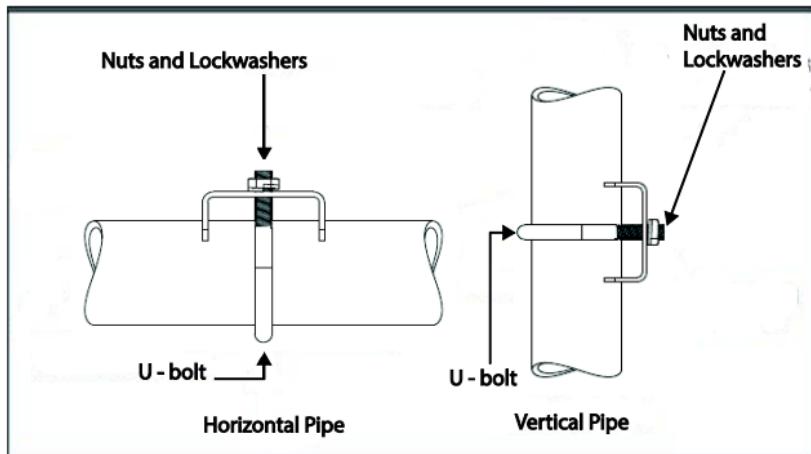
Pipe Mounting Bracket Secured to a Horizontal or Vertical Pipe
